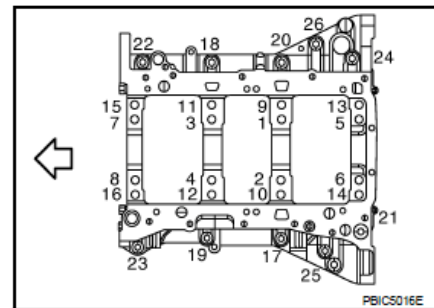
Identifying Lower Cylinder Block Bolts Tightening Sequence
